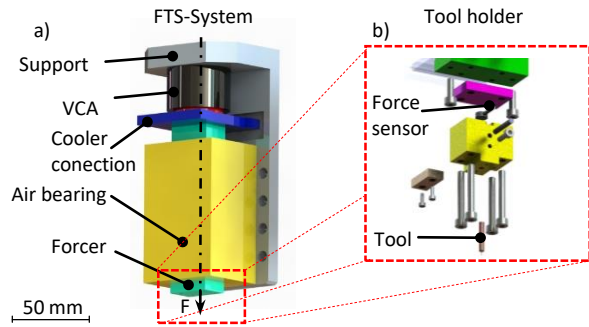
a) 3-D model of the fast-tool-servo used for the experiments b) Tool holder and coupled force sensor used
